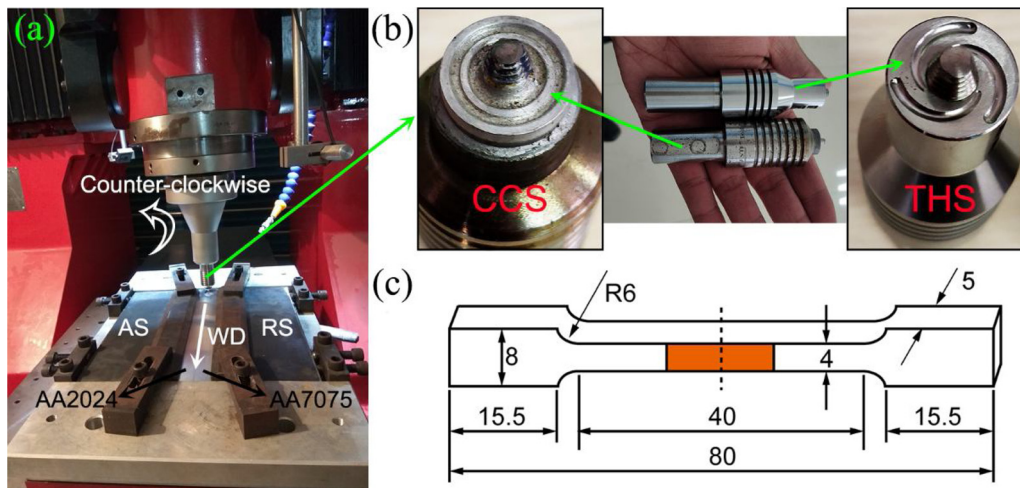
The FSW process: (a) the FSW machine and the clamping platform, (b) the tools and (c) the size of the tensile samples.
